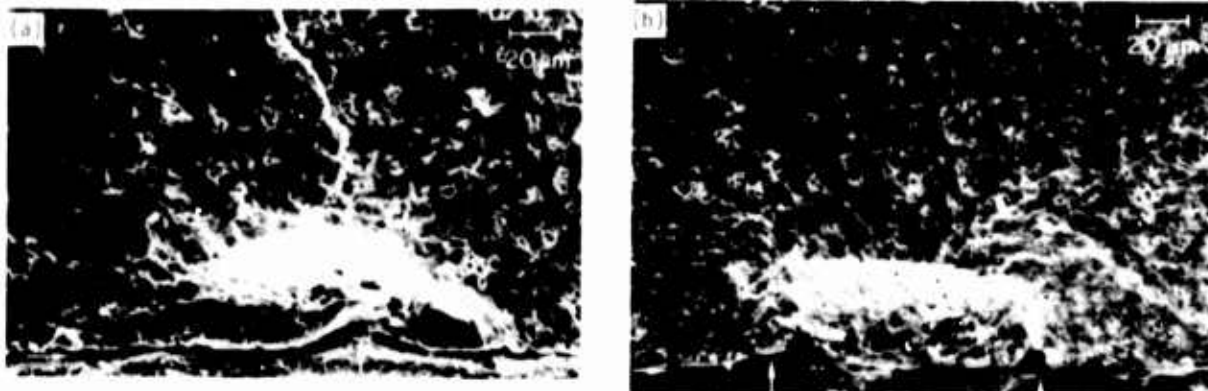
Examples of machining flaw failure origins in reaction sintered Si_3N_4 . Note the somewhat irregular and out of plane character to the flaw shown in (a) from grinding parallel with the tensile axis. Note the deeper grinding gouge (vertical arrow) associated with this machining flaw. (b) shows a more elongated flaw from machining parallel with the tensile axis. The longer character of this flaw for machining parallel with the tensile axis is apparently due to its extension between two deeper grinding gouges (vertical arrows). Note in both of the above photos that the horizontal arrows mark the demarcation between the fracture surface and the tensile surface.
